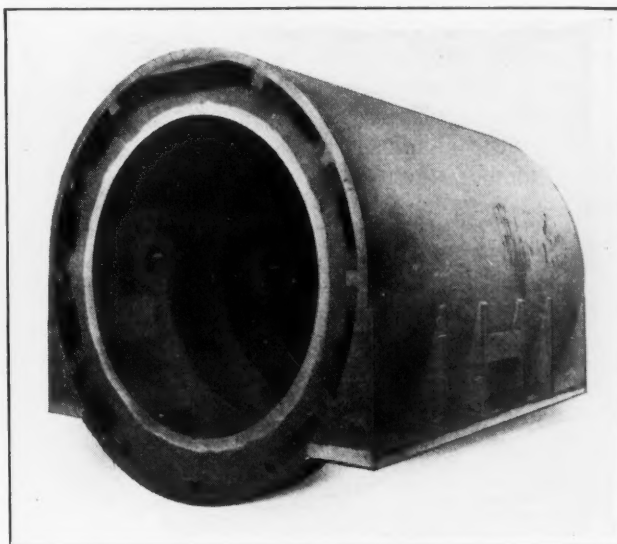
Large Stator Frame Completely Built Up by the Application of Metallic Arc Welding
